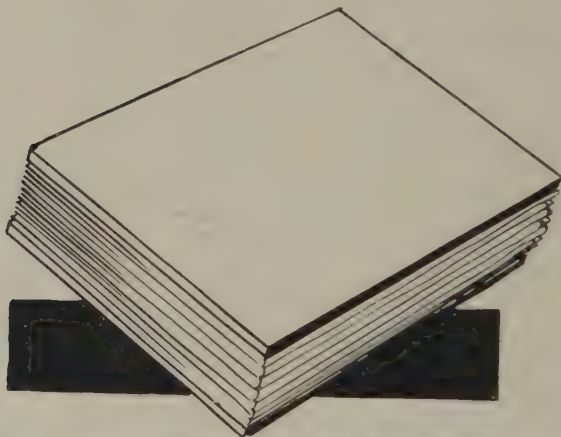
BOOK JOGGED WITH BOARD ON EITHER SIDE
